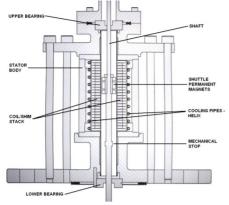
The stator mounted in its supporting flanges. The stator body with its end caps measures 90 mm. The full length of the target shaft (not completely shown) is 560 mm.
